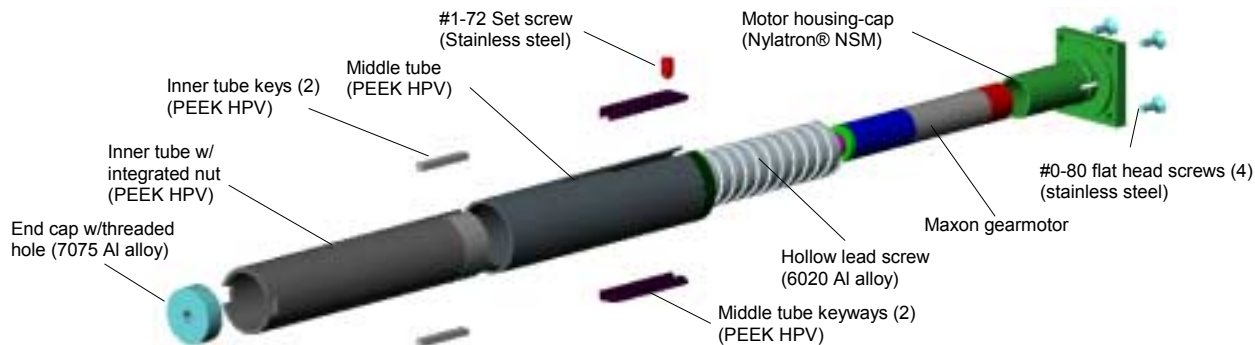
Exploded assembly view of the telescoping tube linear actuator.
